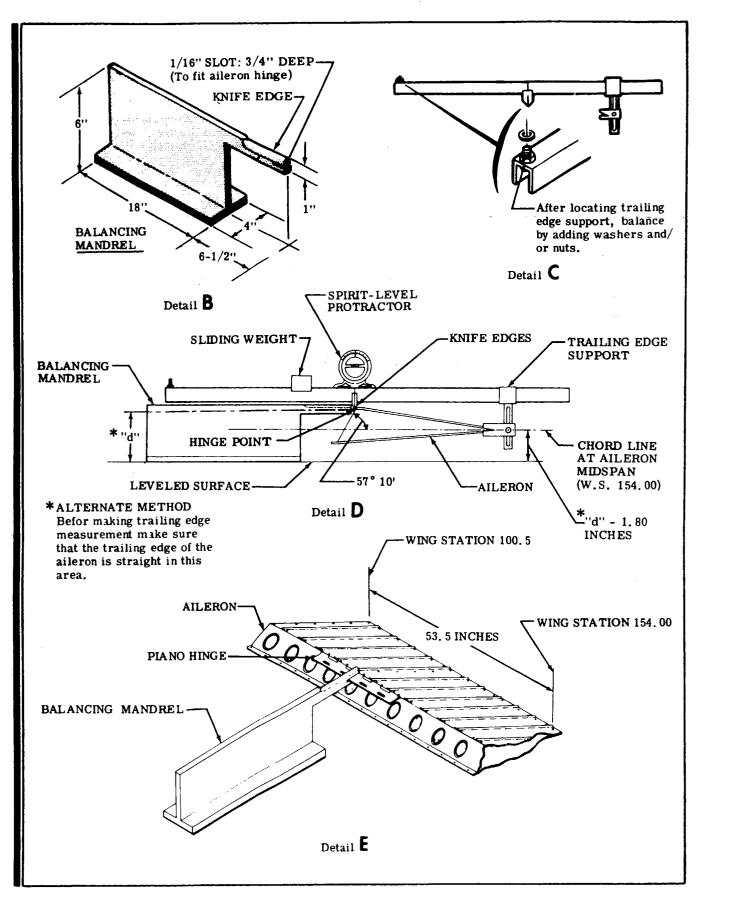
Control Surface Balancing (Sheet 3 of 5)
